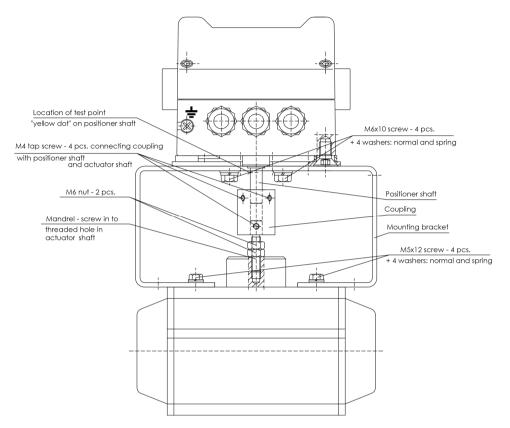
Assembly of the APIS-150-... and APIS-250-... positioner with mounting set APIS-A050 or A051 on rotational actuator of one-sided and double-sided operation.
